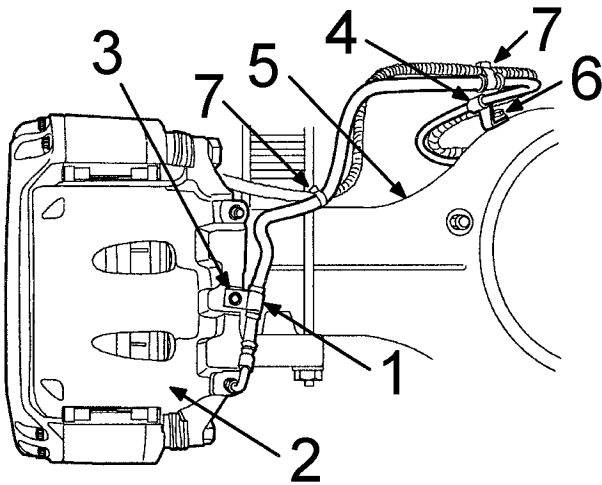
Install Brake Line Retaining Clips on Rear Axle and Caliper
